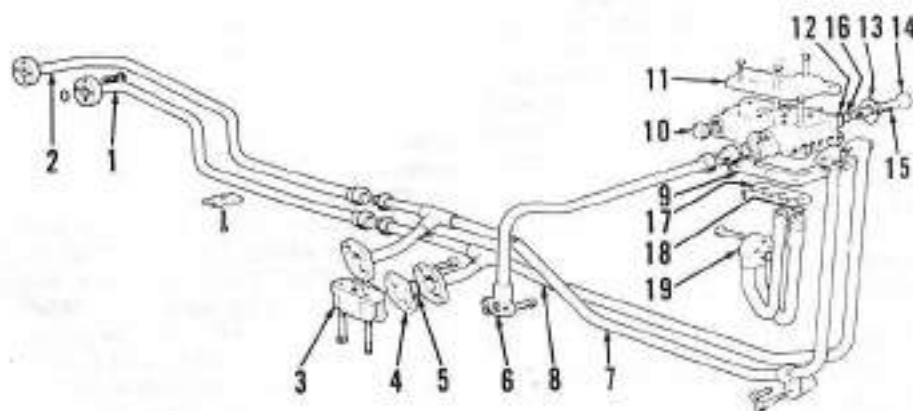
Exploded view of high pressure hydraulic lines for model 1200 with dual hydraulic pump: pump suction lines, filters, and lubrication line are as shown in Fig. 214 for models with single hydraulic pump. Combining valve (14) separates flow of one pump to tractor hydraulic piston and flow of second pump to remote control valve, or combines flow of both pumps to remote control valve.
